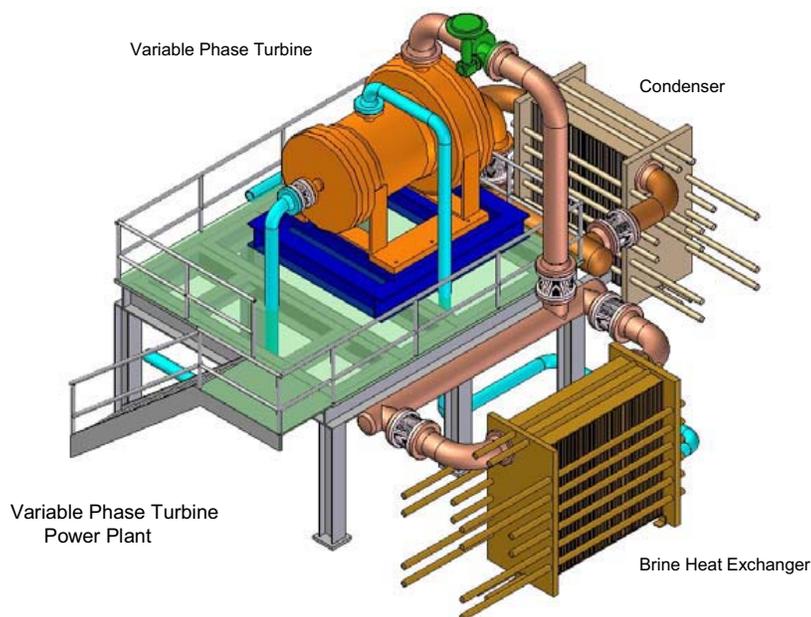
VPC 1 MW geothermal power plant with plate-and-frame heat exchangers.
